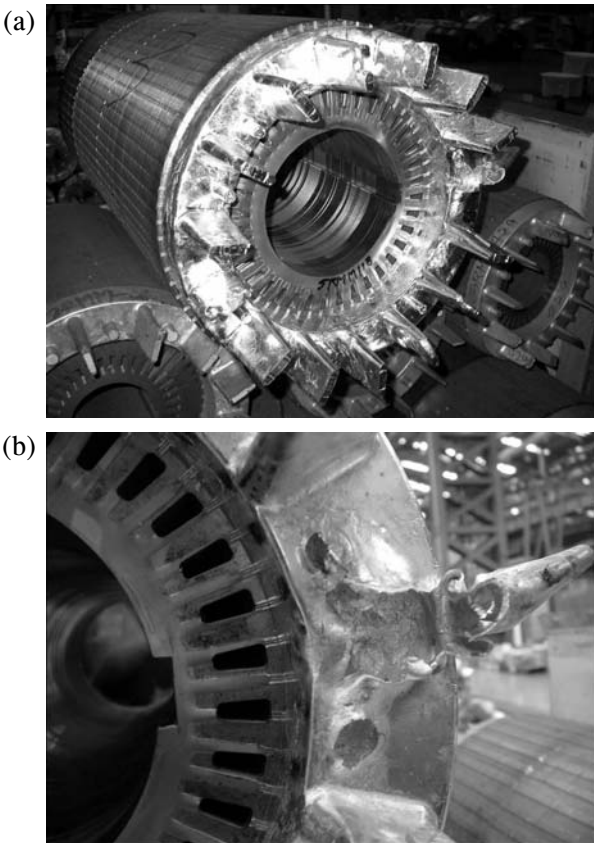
Actual motor rotor with misrun (a) motor rotor (b) detail of "A"
